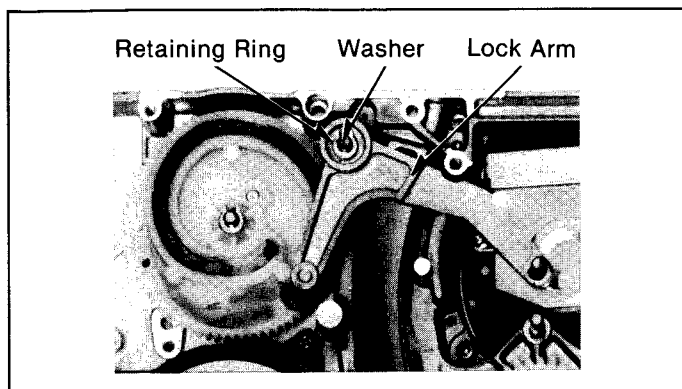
Assembly and Adjustment of Gears and Rod-(2)
